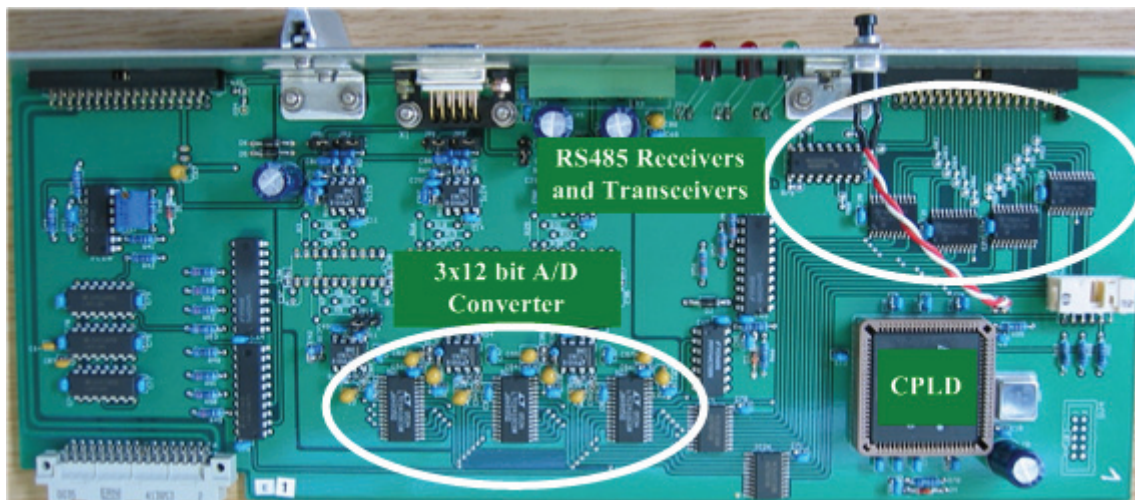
Inverter Interface board implemented in a four layer PCB.
